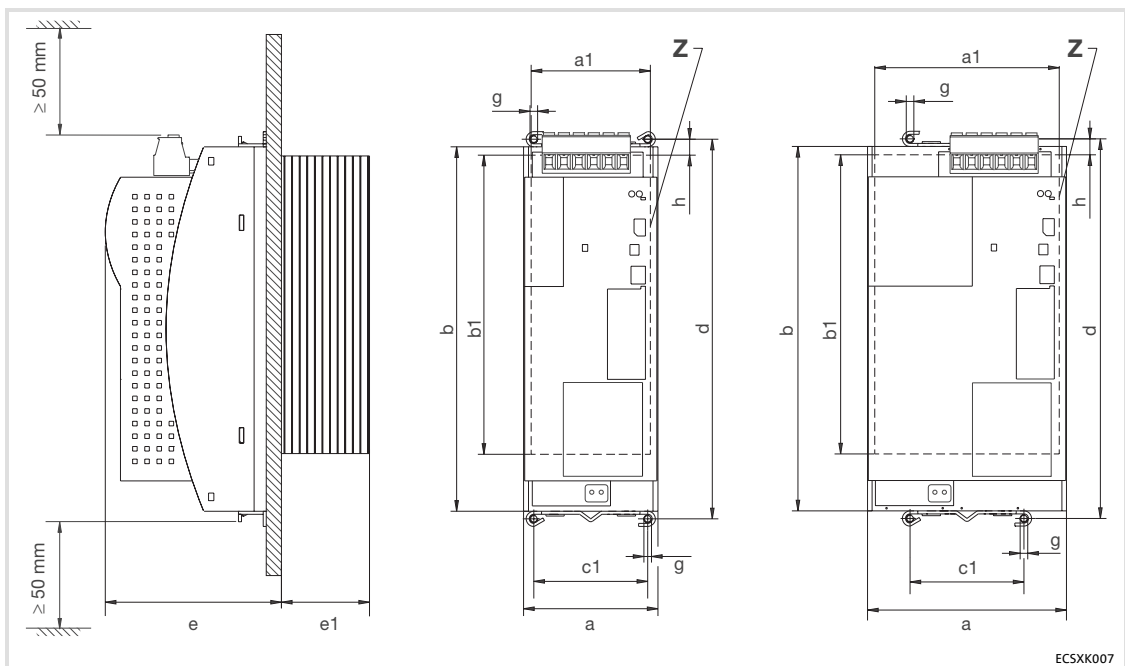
Dimensions for thermally separated mounting, ECSDKxxx type
